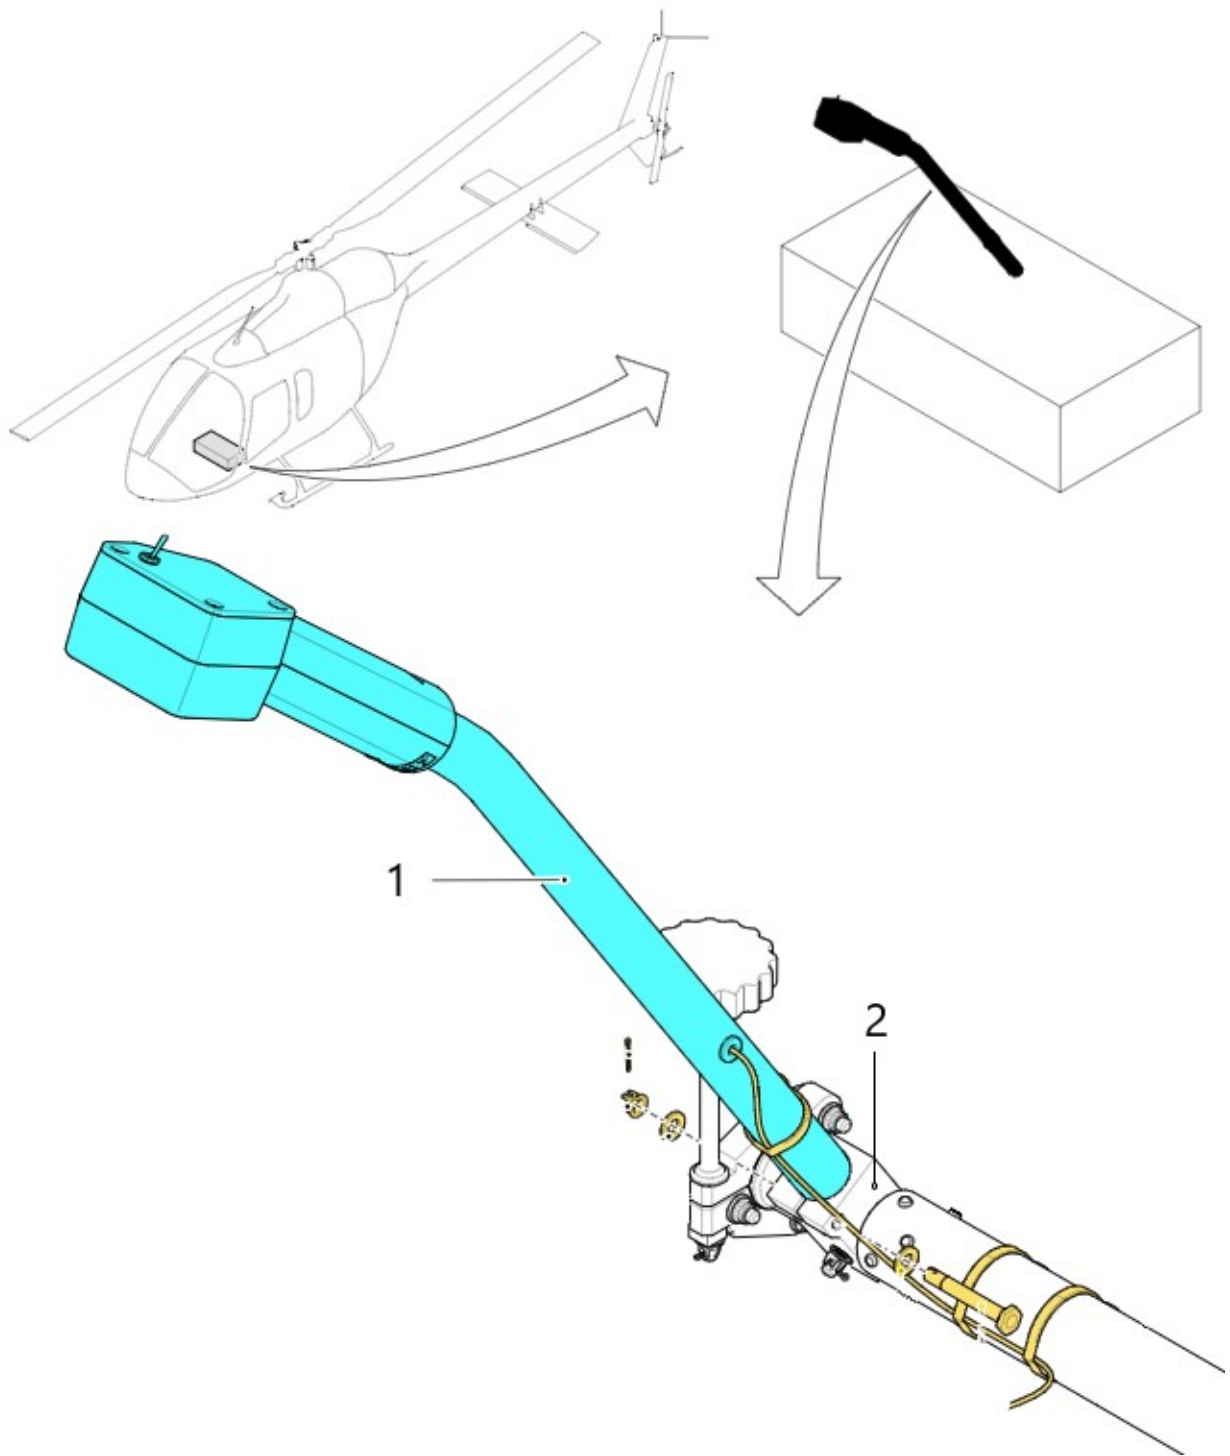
Pilot Collective Stick and Jackshaft Assembly
